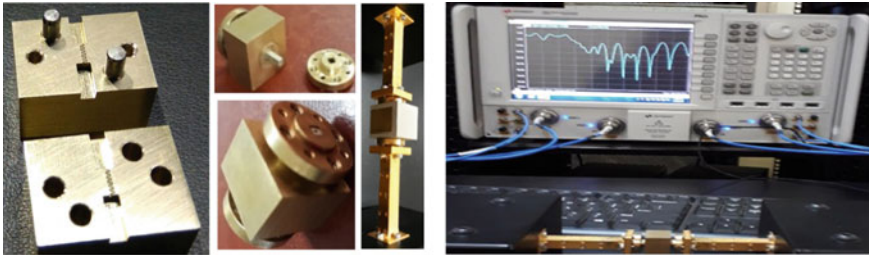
Assembly of FWS and dispersion measurements using PNA N5222A
